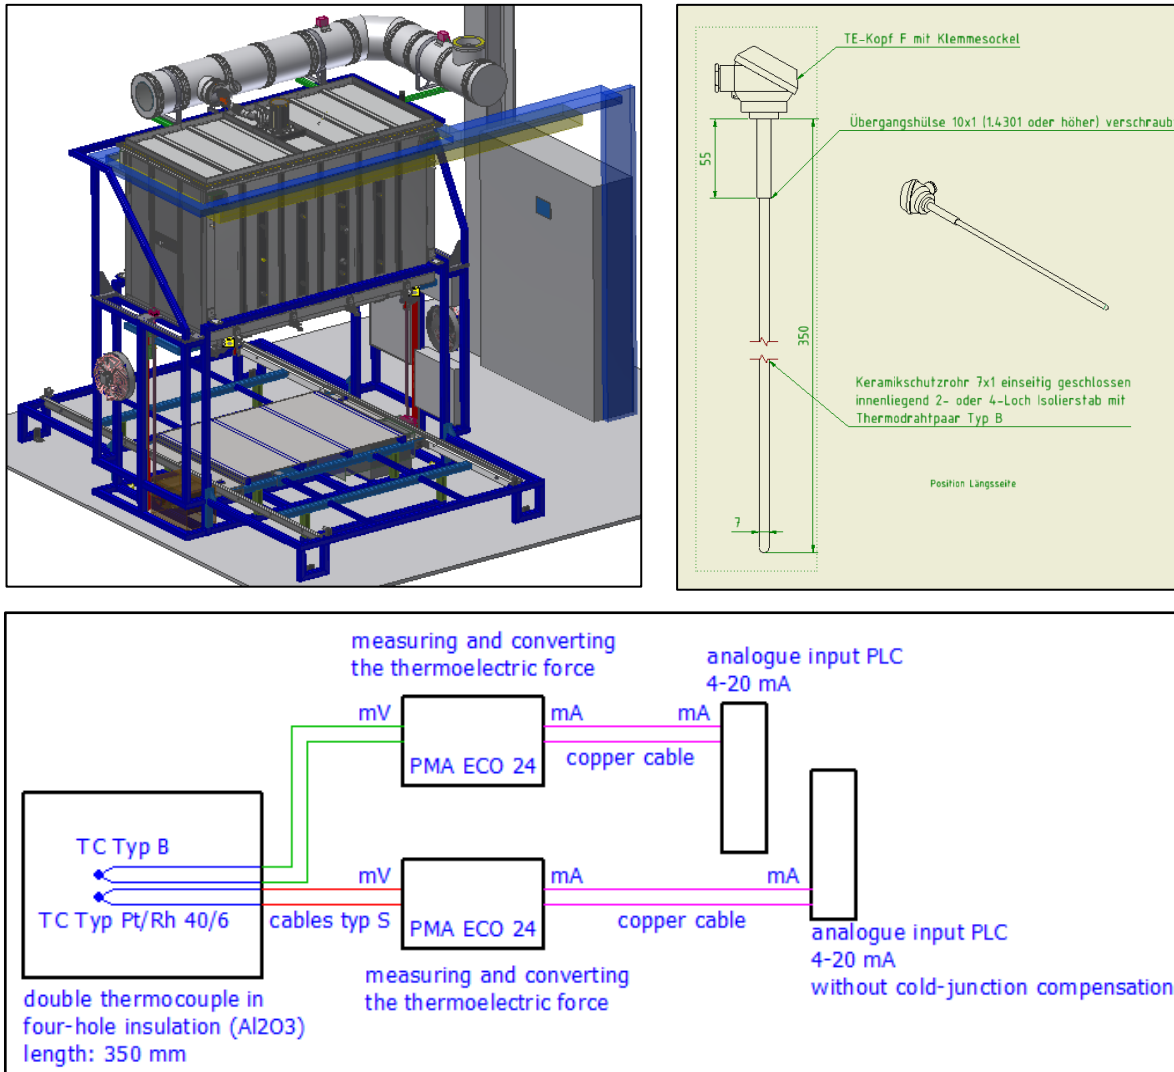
Top left: industrial hood furnace manufactured by MUT. Top right: thermocouple assembly. Bottom: thermocouple connection scheme.
